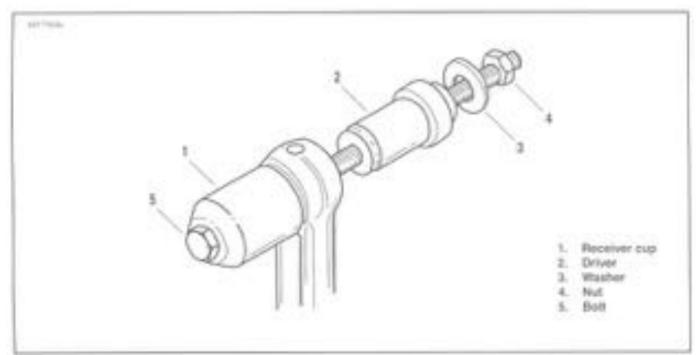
Piston Fin Bushing Tool Assembly for Bushing Removal
